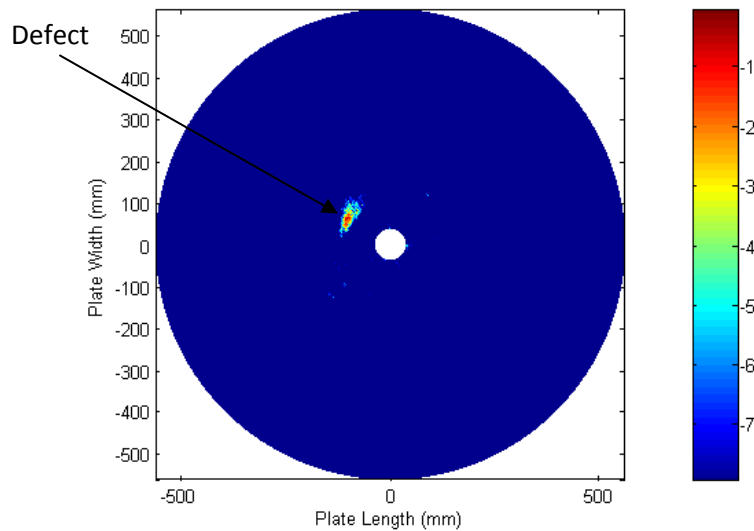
Defect inspection image obtained using the phased array beam steering technique for the notch in the 32 layer composite plate.
